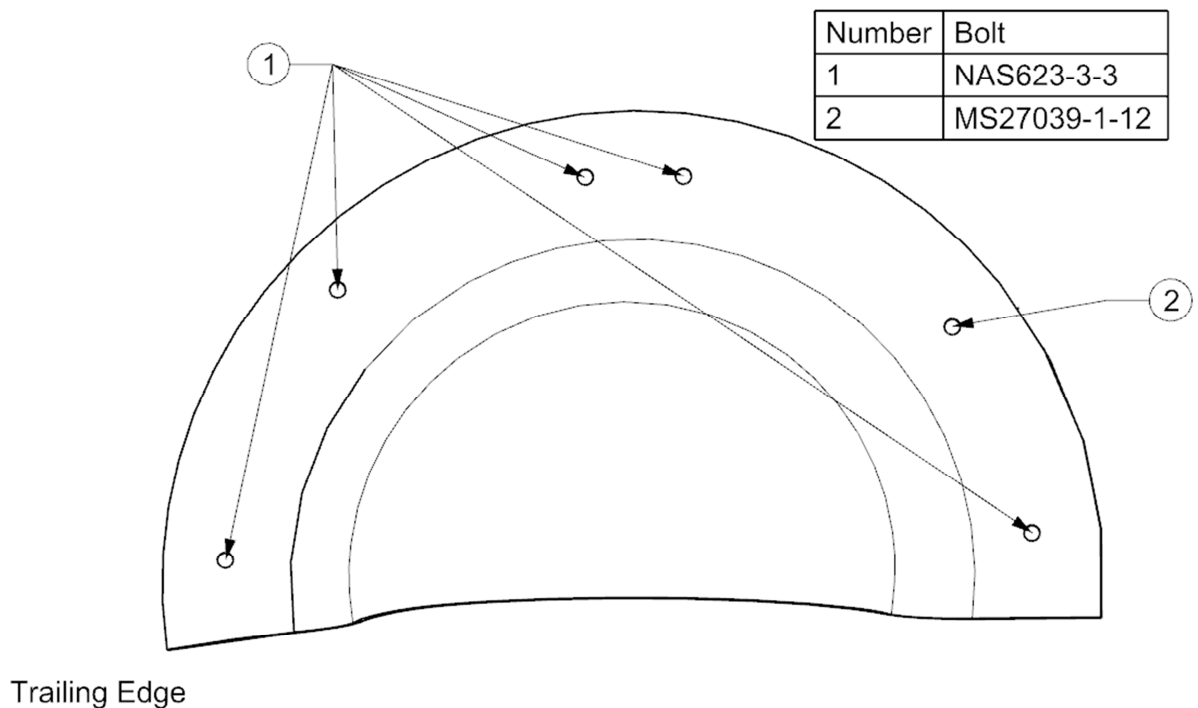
Center Wing Pylon Aft Lug Cover Fastener Placement
